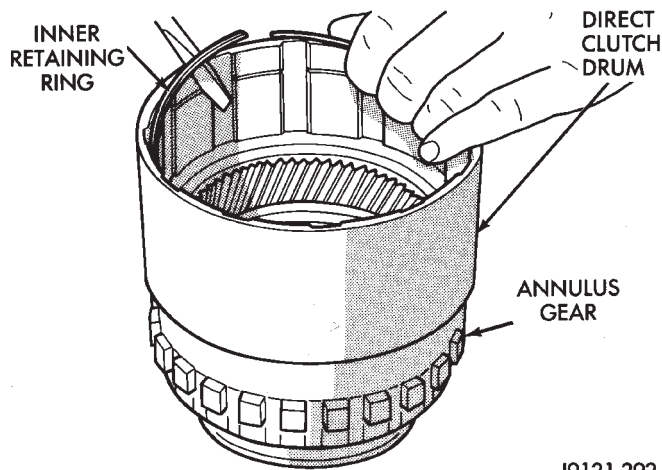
Clutch Drum Inner Retaining Ring Removal
